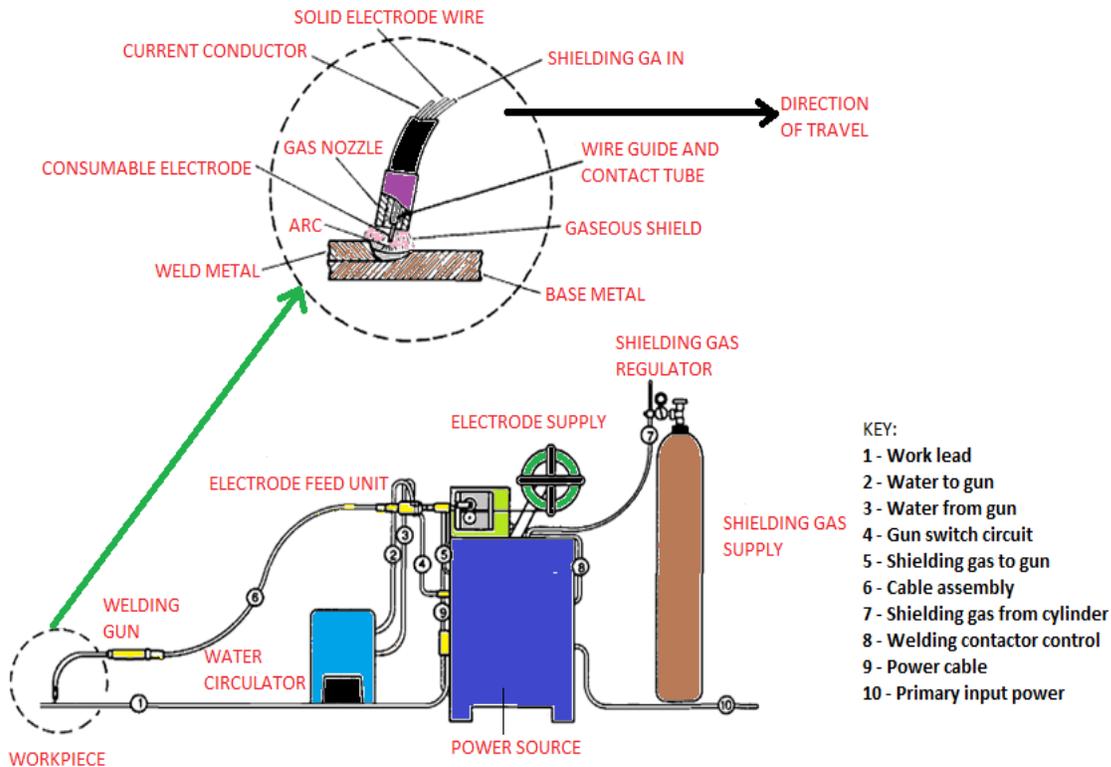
Schematic diagram of gas metal arc welding process (GMAW) [48].
